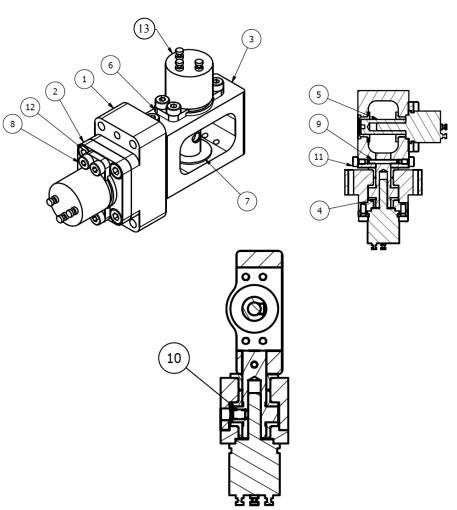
Lower (left) abdomen IR-TRACC pivot assembly components
